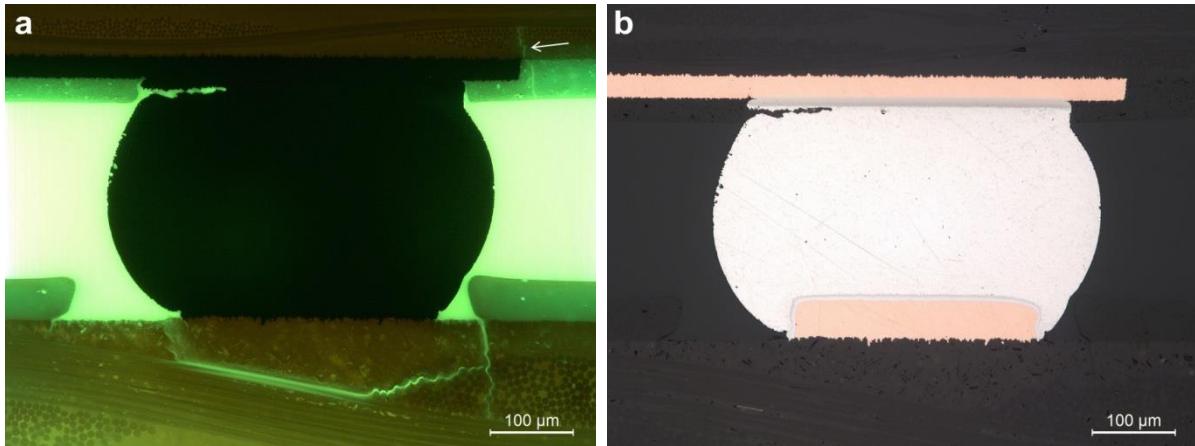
a) Image of solder joint T9 in Fig. 15 with larger magnification showing a very fine crack in the BGA laminate. b) Image of the same cross-section but taken with ordinary light.
